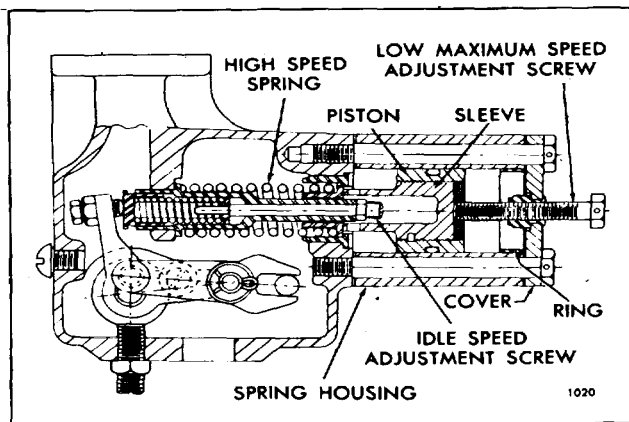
Spring and Piston Assembly of Former Dual Range Governor
